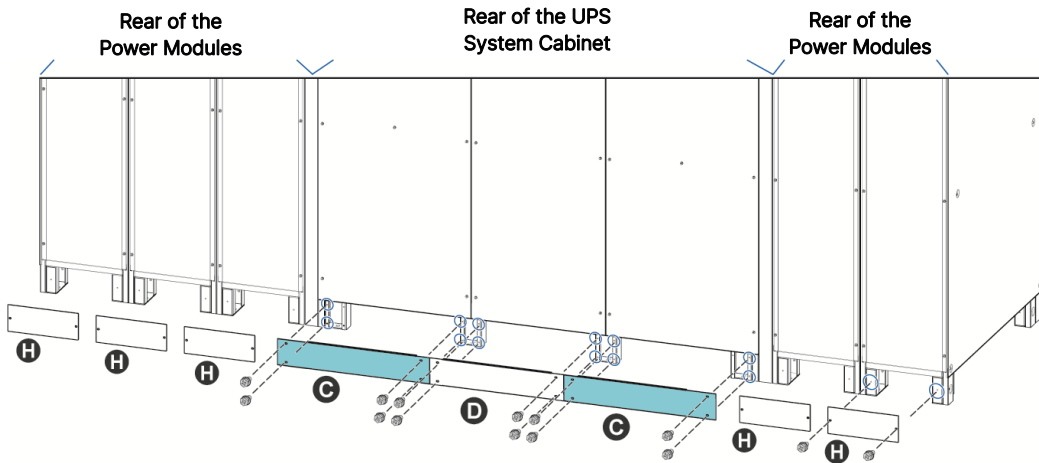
1250kVA UPS _ Install the Rodent Shields at the Rear Bottom
